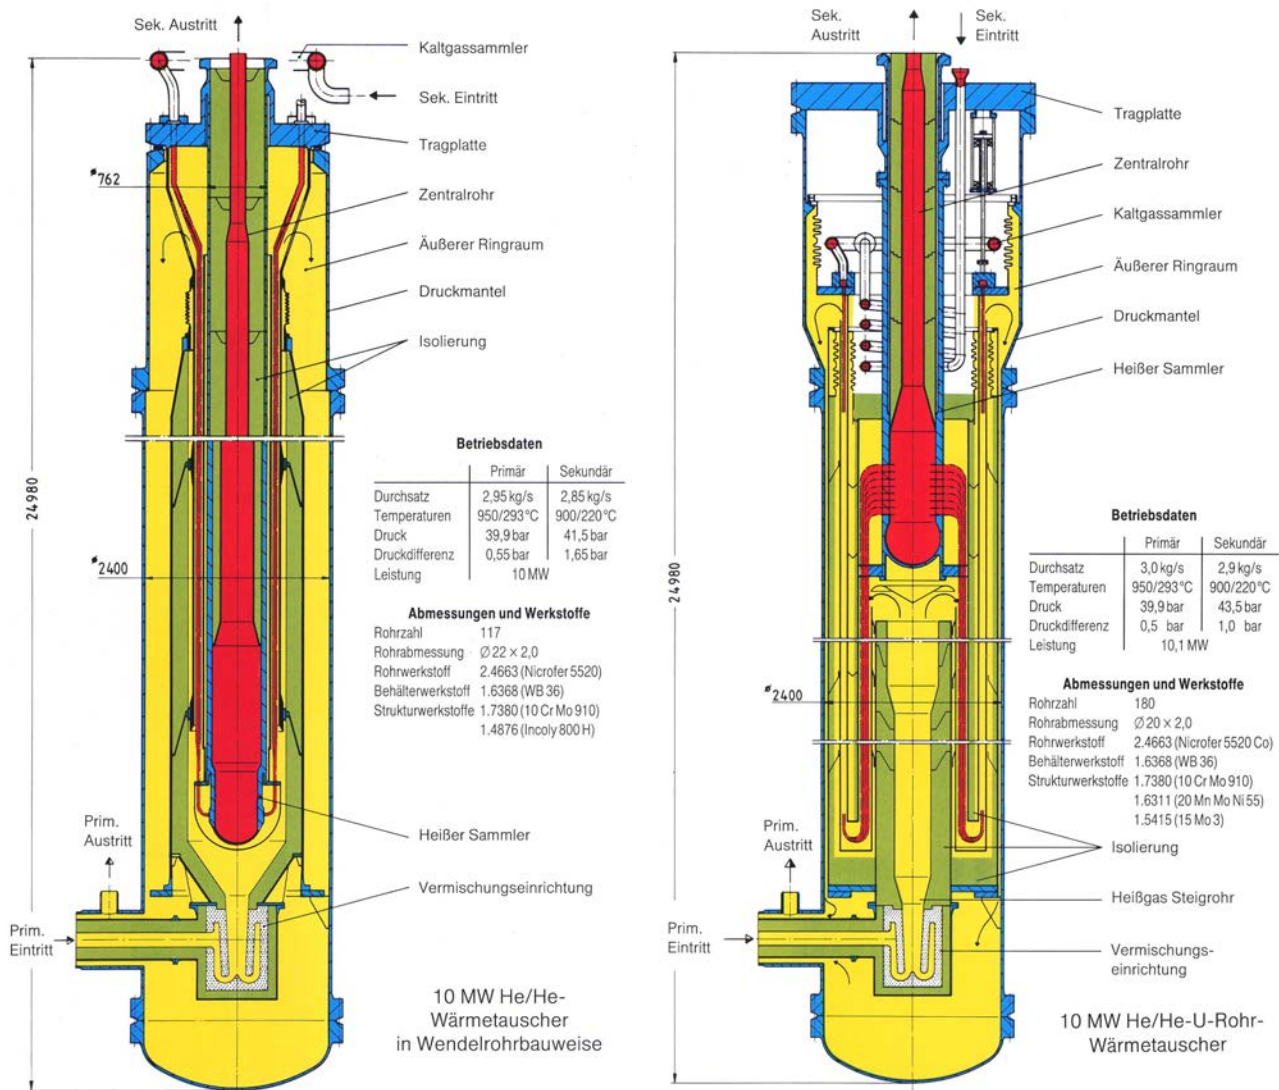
Two IHX components tested in KVK with helical tube bundle by Steinmüller company (left) [328]; U-tube bundle by Balcke-Dürr company (right) [329].
